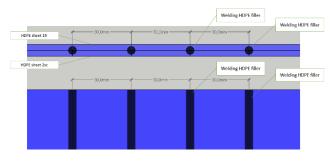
Welding pattern in HDPE sheet elimination
